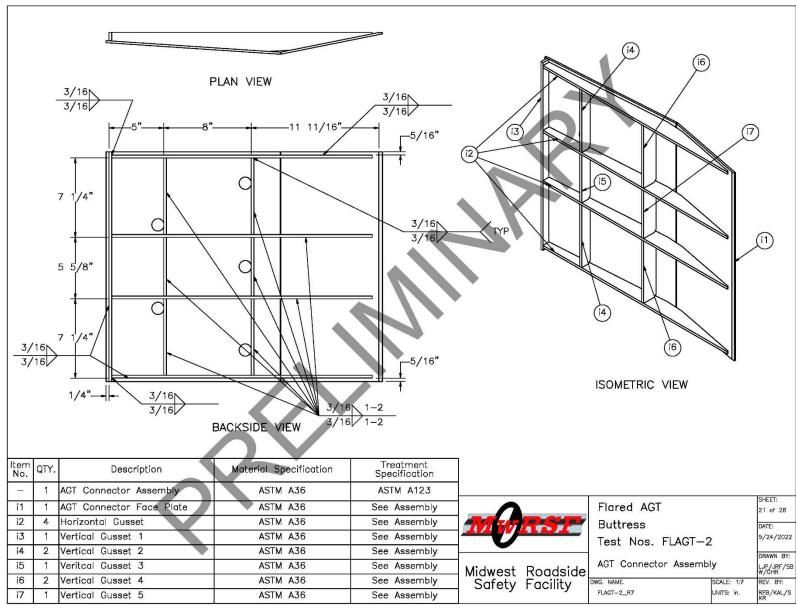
AGT Connector Assembly, Test No. FLAGT-2
